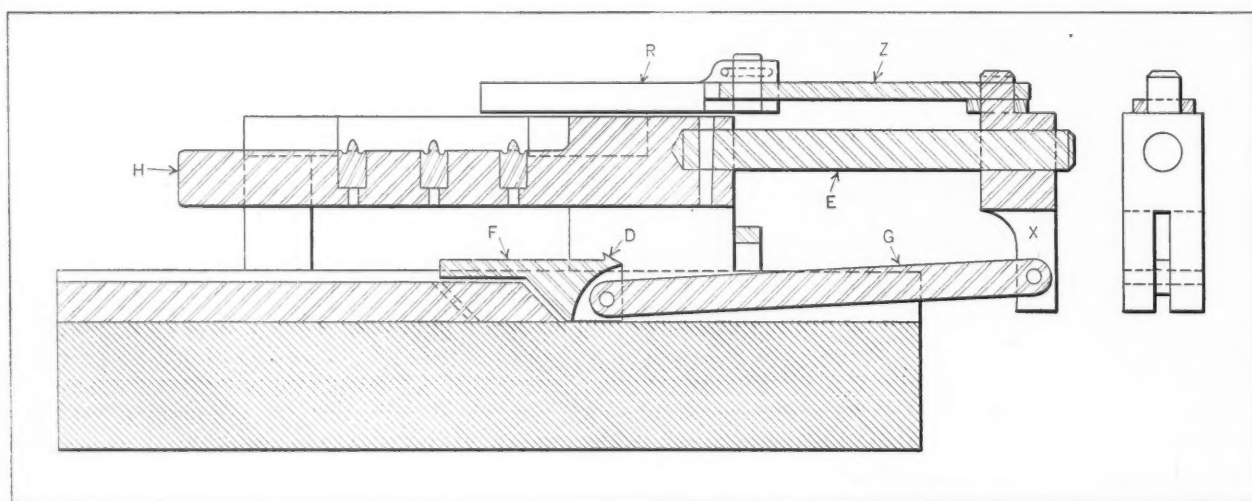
Section of Die Illustrating Ejecting Mechanism
